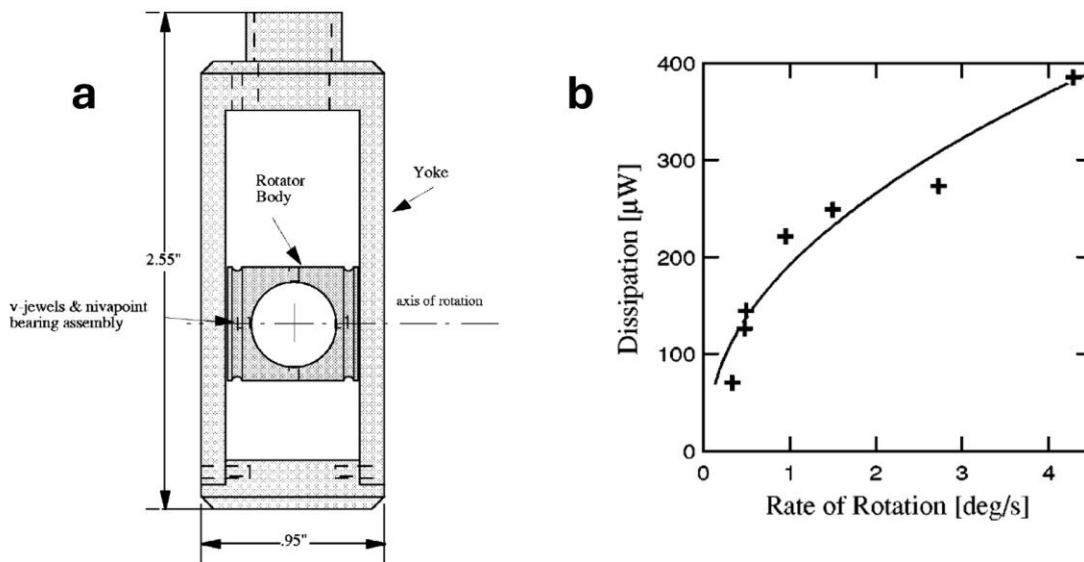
Reproduced Figs. 1 and 2 of [91]. (a) Technical drawing of the rotator. String is wrapped around the rotator body and threaded up through the holes indicated by dashed lines at the top of the yoke. (b) Heat dissipation for 20 s rotations.
